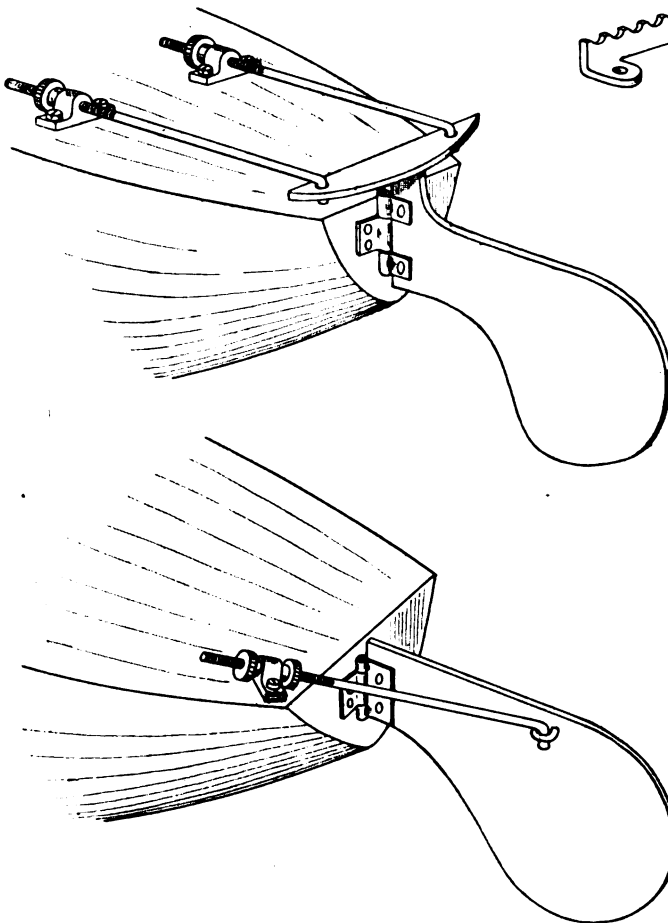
THE STEERING GEAR OF THE "MARSOIN."
